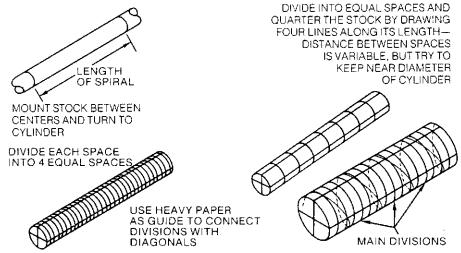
This is the kind of layout you must use to prepare stock for spiral forming.
